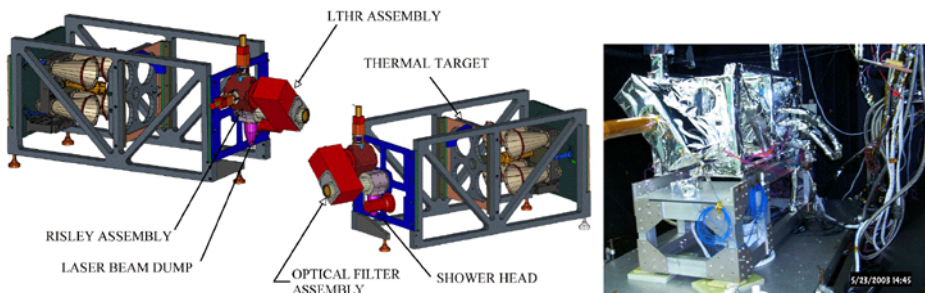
MLA thermal vacuum test fixture used for instrument-level thermal vacuum testing. The fixture provided a stable platform to monitor alignment and inject optical signals during testing
